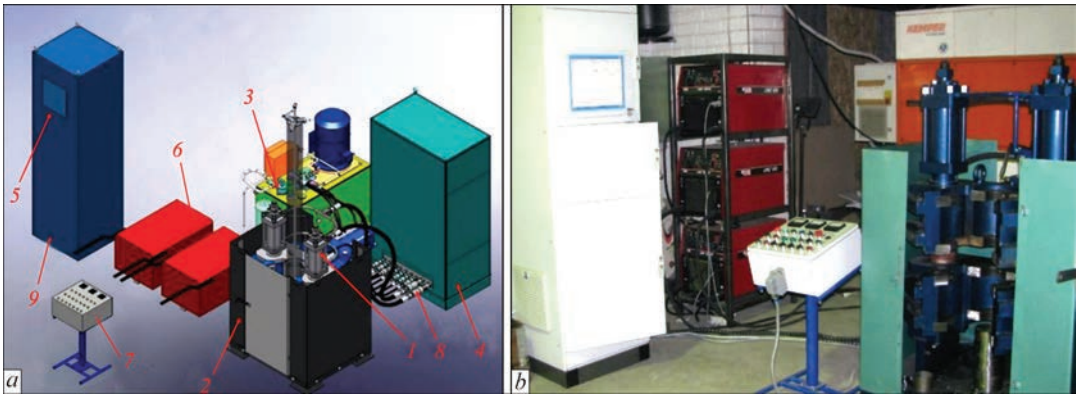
MD205 pipe welding machine, where: *a* — equipment for MIAB; *b* — MD205 machine in production
